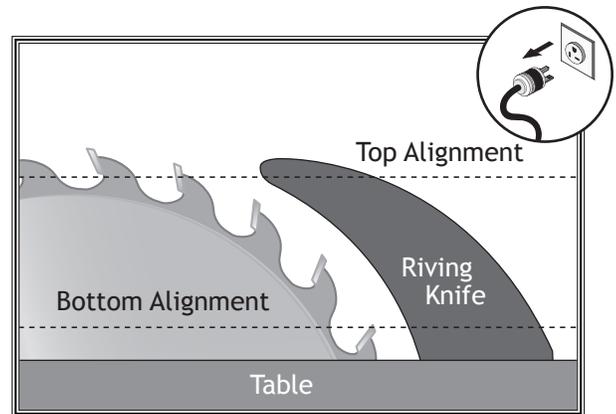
Example of checking top and bottom riving knife parallelism with blade.
